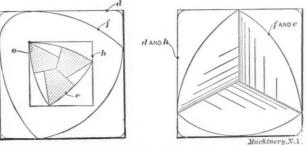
The Cutting Tool and Shank used for Sharp Corners or Round Holes.
